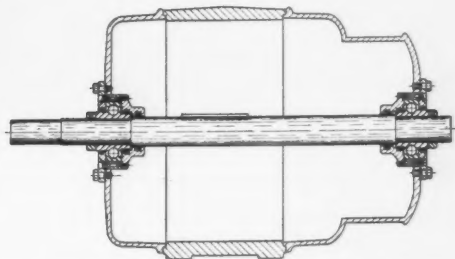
Shuttle conveyor section showing the wheel mounting
